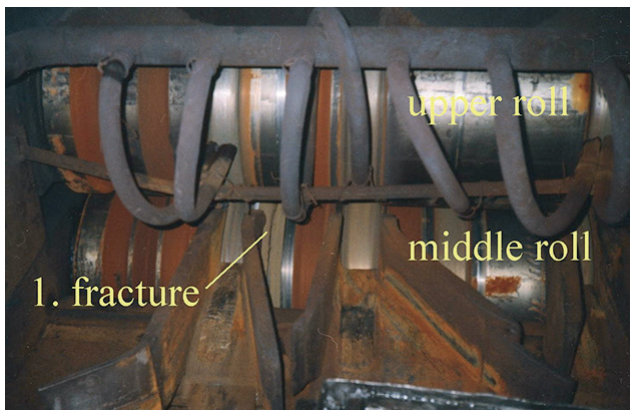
Position of 1<sup>st</sup> fracture (back side of the stand)
